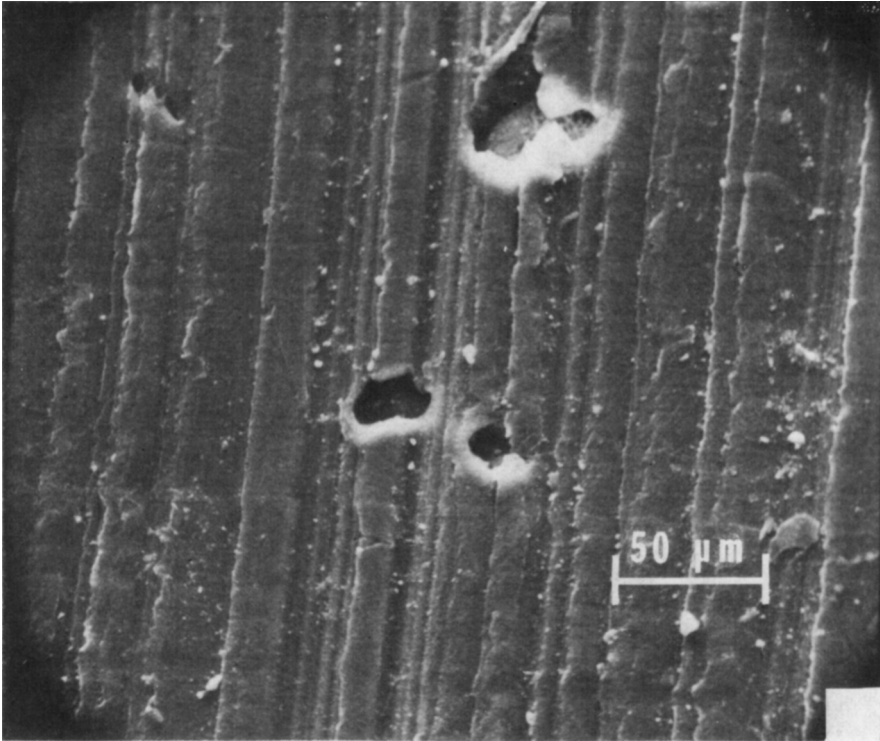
Typical surface defects in prosthesis #3, as received: machine markings and porosity.
